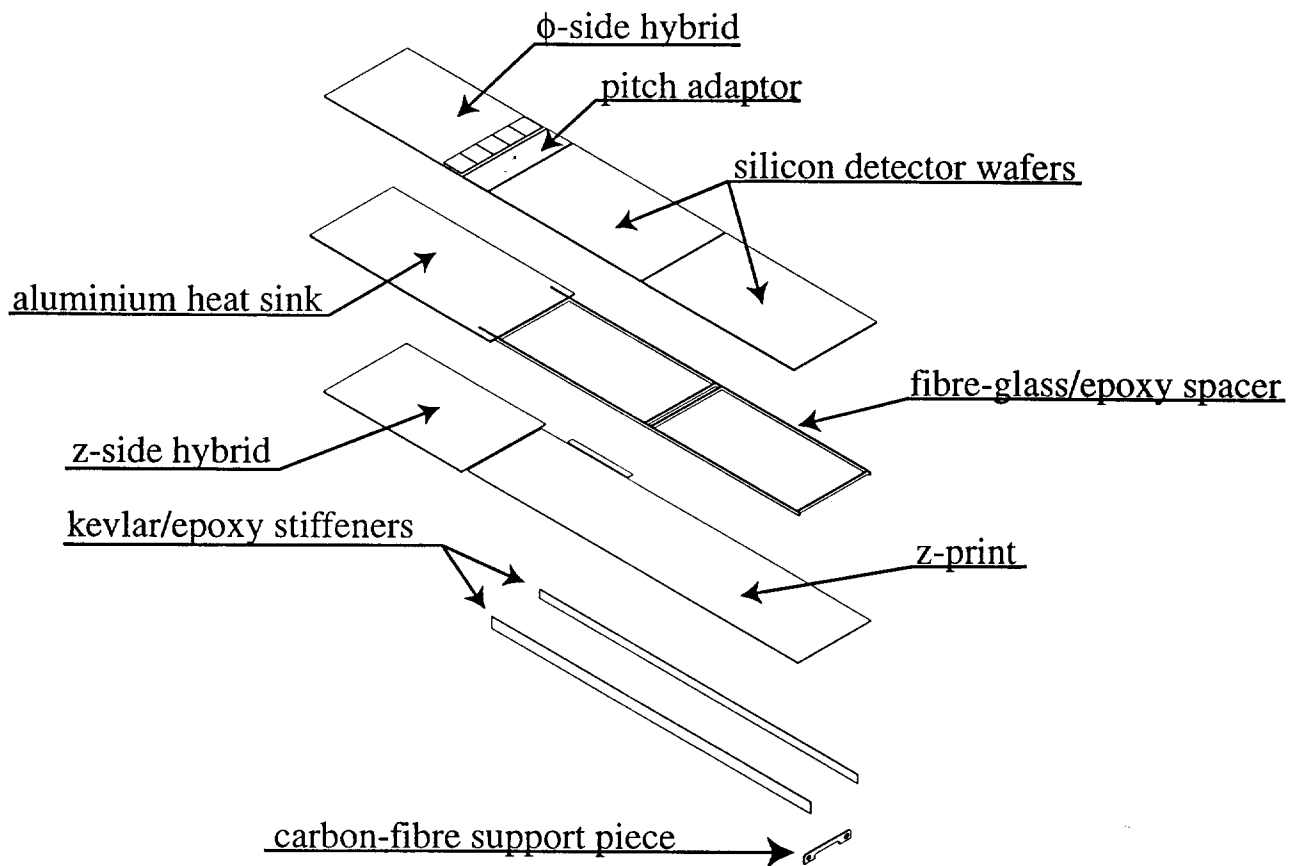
Schematic exploded view of a short μ VTX3 ladder.
